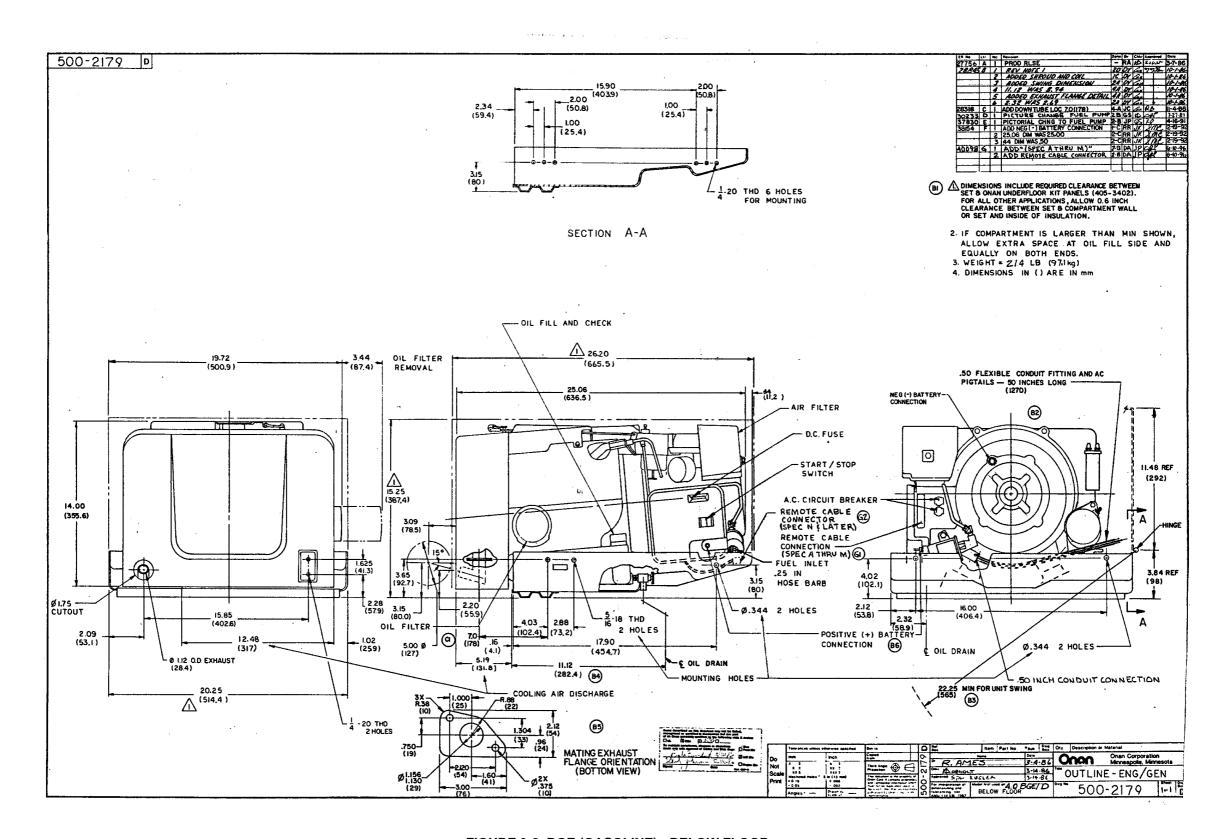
BGE (GASOLINE) - BELOW FLOOR
